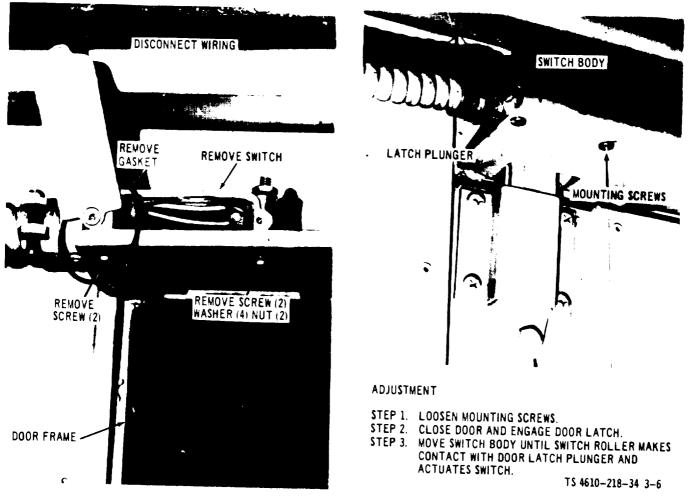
Door Blackout Switch, Removal, Installation, and Adjustment
